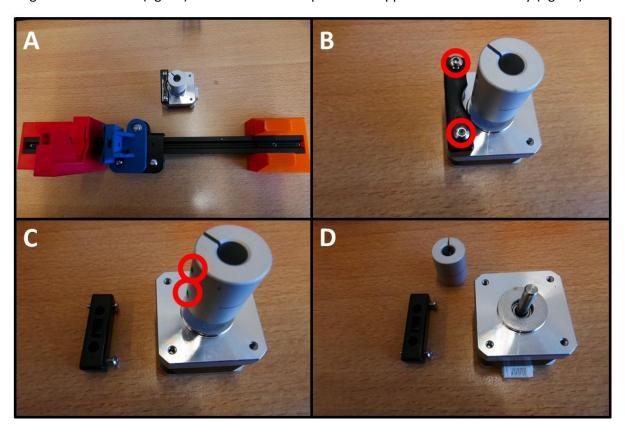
Preparing the stepper motor for installation. A) Overview of the E Plate pump and stepper. B) Removal of bracket. C) Removal of shaft coupler. D) Stepper ready for use in pump.
